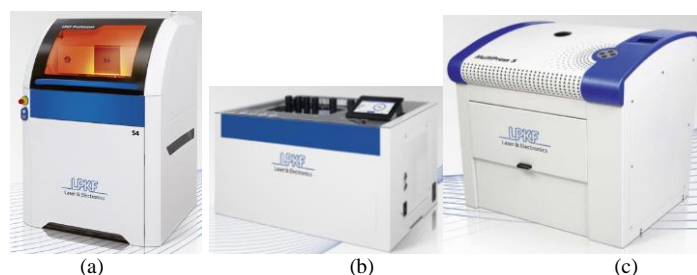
(a) Laser etching machine ProtoLaser S4 (b) Through-hole plating machine LPKF Contac S4 (c) LPKF MultiPress S
